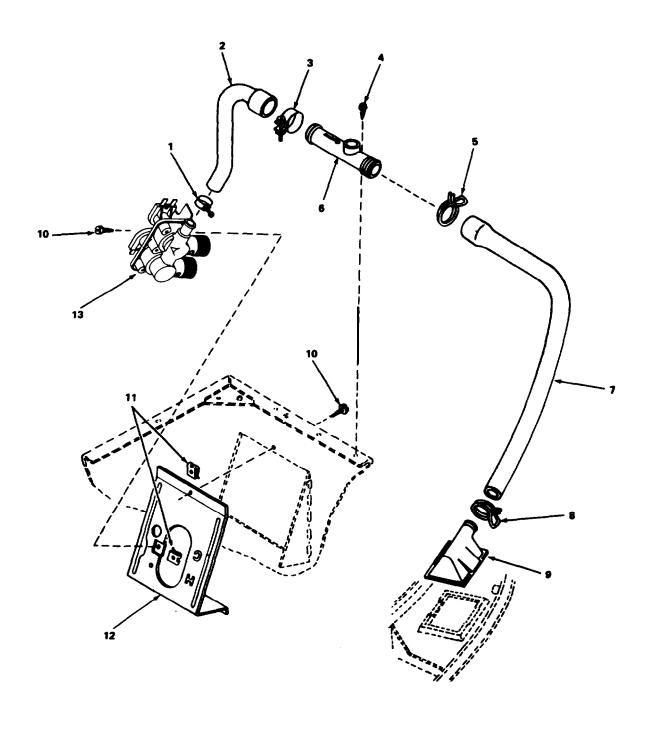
Washer Machine Water Mixing Valve Assembly.
